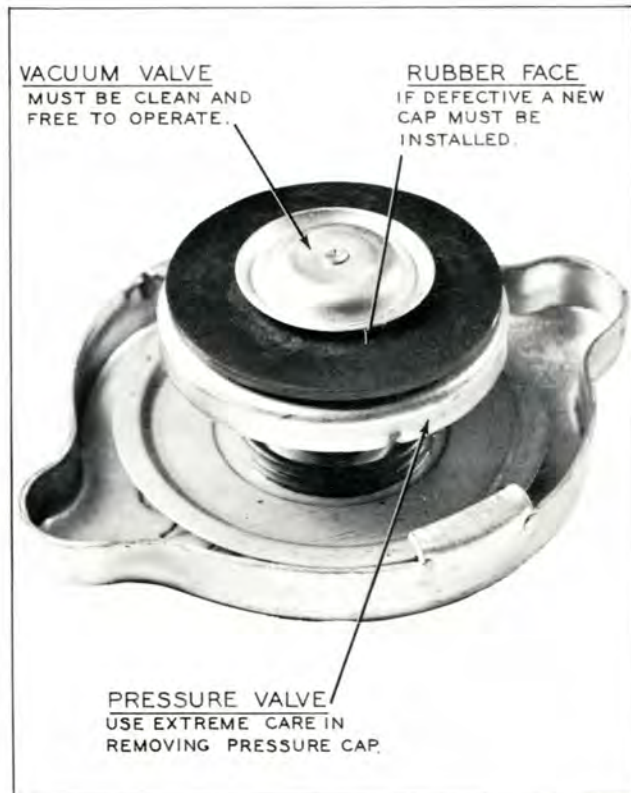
Pressure Cap Gasket, Valve and Valve Gasket
